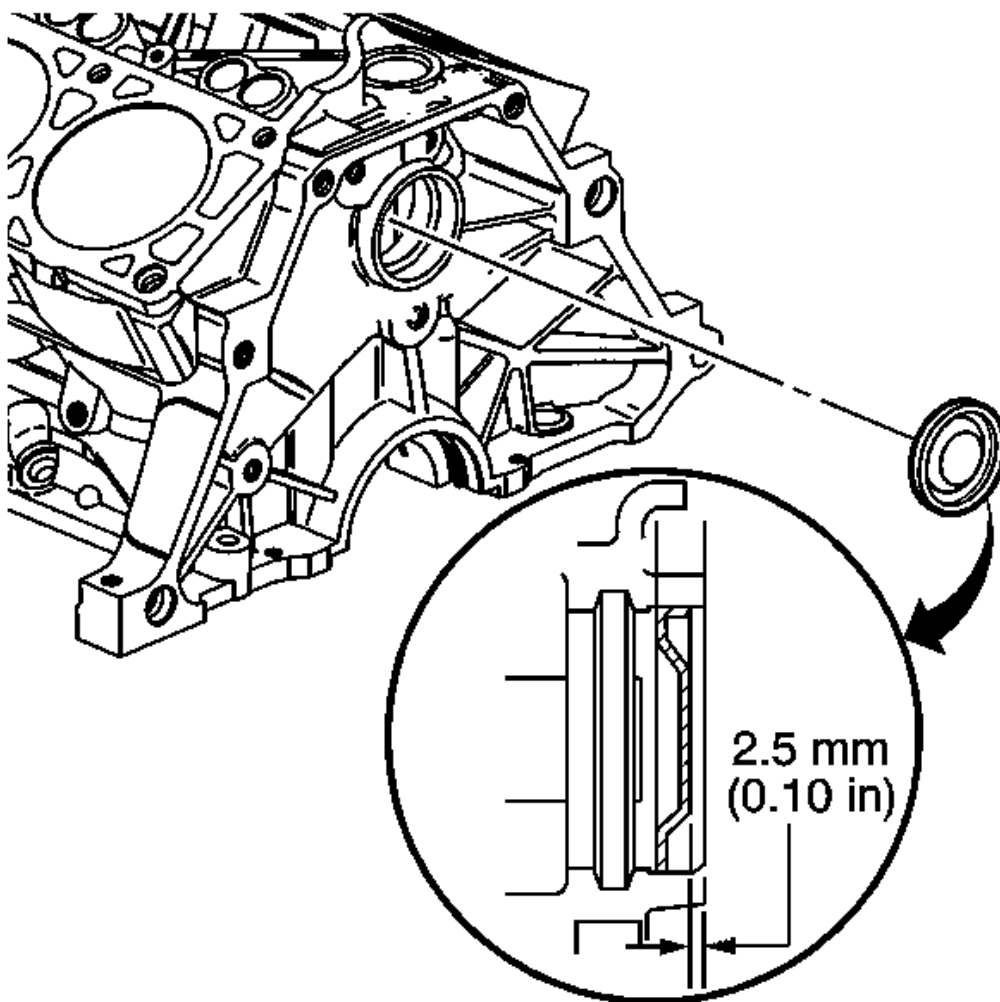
Identifying Camshaft Rear Bearing Hole Plug Installation Depth
